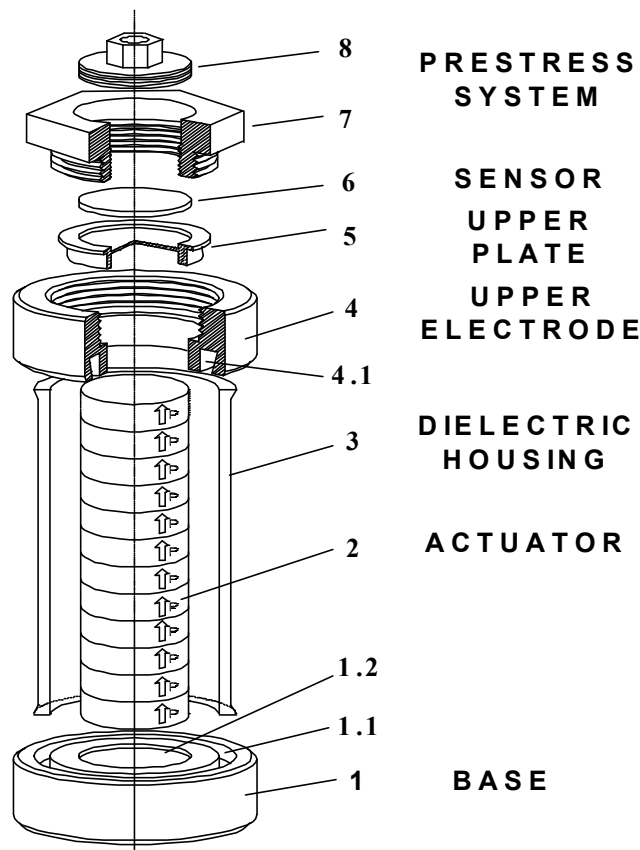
Mounting of the PIEZOTRAF3 prototype
